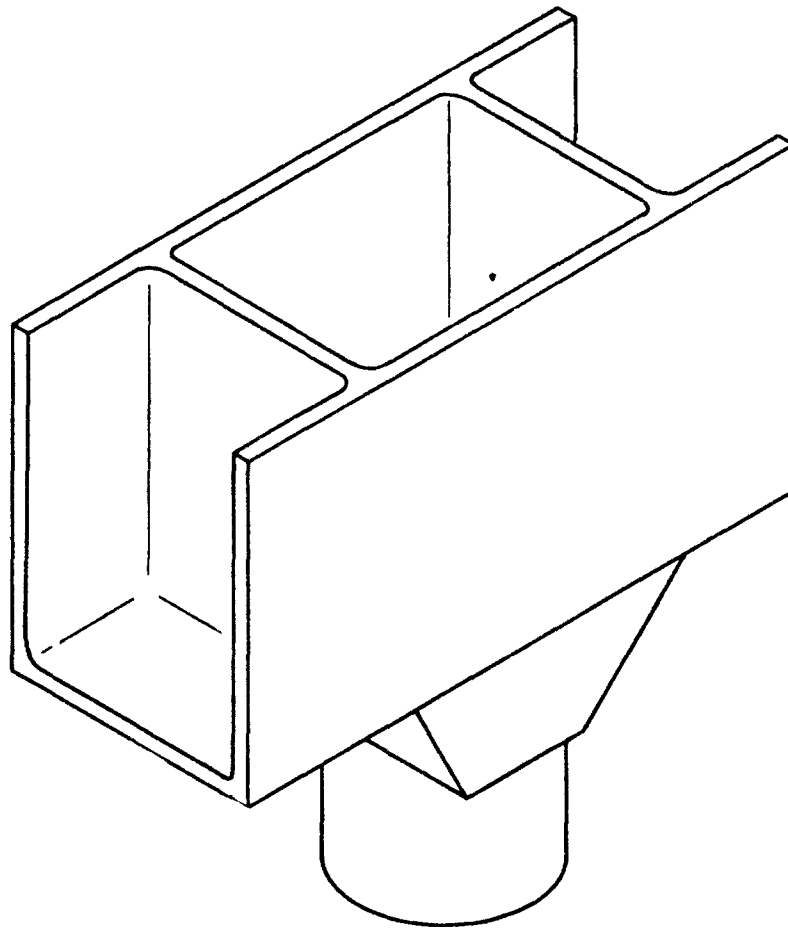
SKETCH OF FINISHED FORGING IDENTIFIED AS BOEING PART
